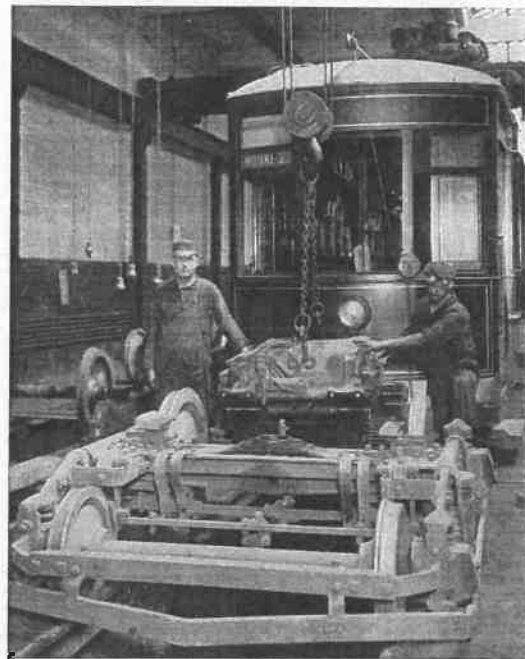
Removing a 65-H.P. Box Frame Motor from the Truck. This operation takes fifteen minutes to perform
